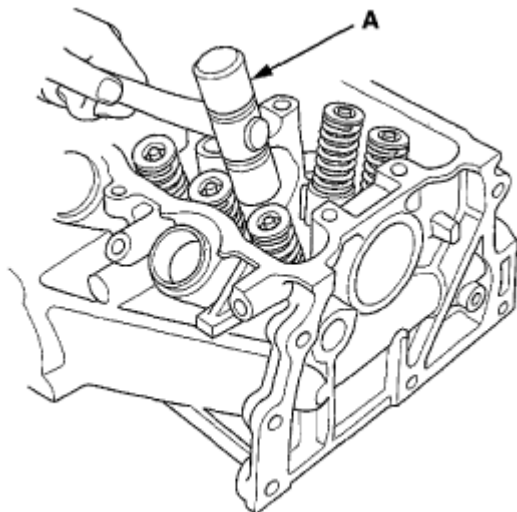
Tapping Valve Stem With Plastic Mallet To Ensure Proper Seating Of Valve And Valve Cotters
